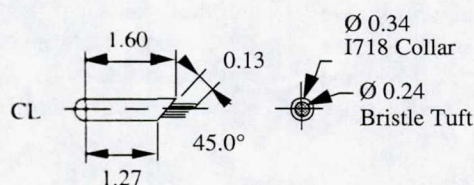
Tuft specimen configuration showing dimensions and geometry (dimensions in cm).
